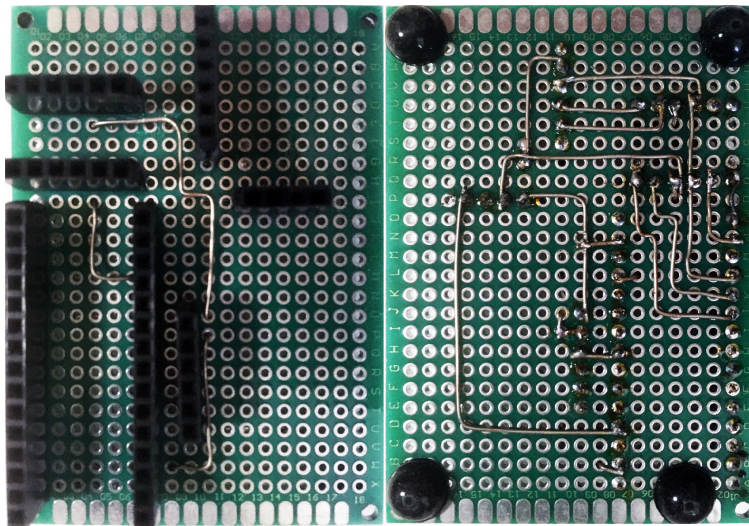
PCB board with the connectors soldered. The left figure shows the upper section of the board and the right figure shows the lower section.
